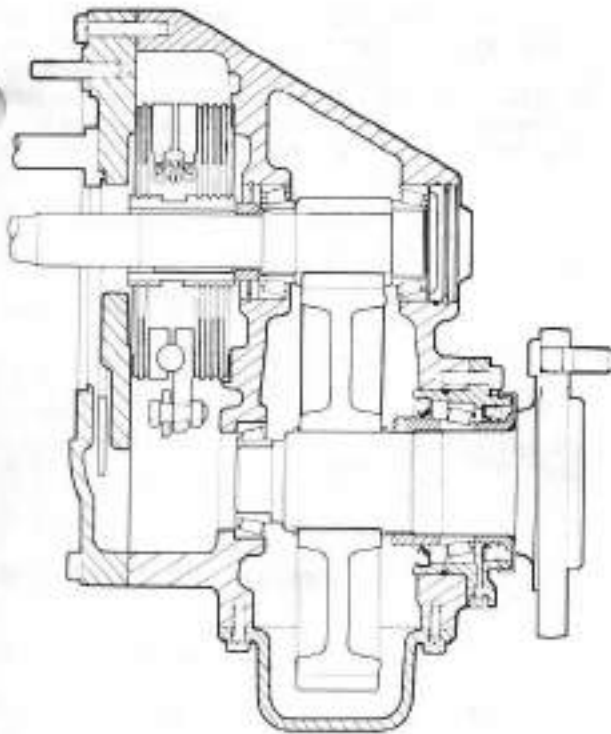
Cross-section drawing of final drive and disc brake assemblies shown in Figs. 135 and 147.
